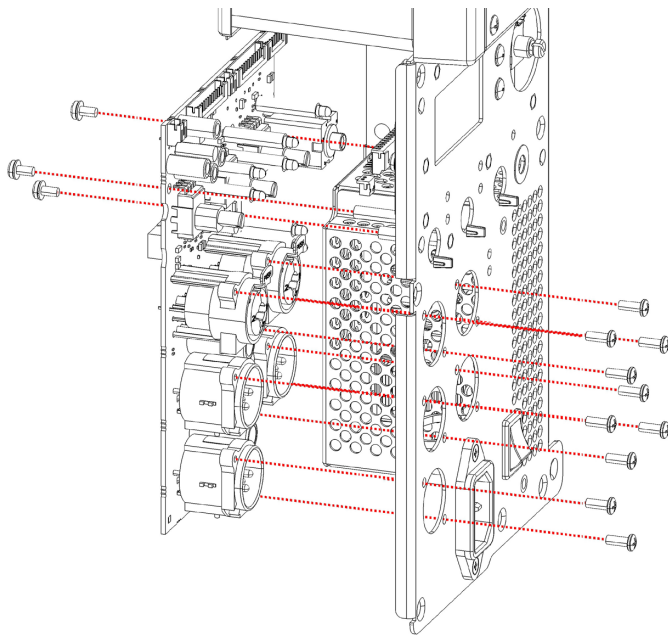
Input/DSP board assembly to chassis front plate
